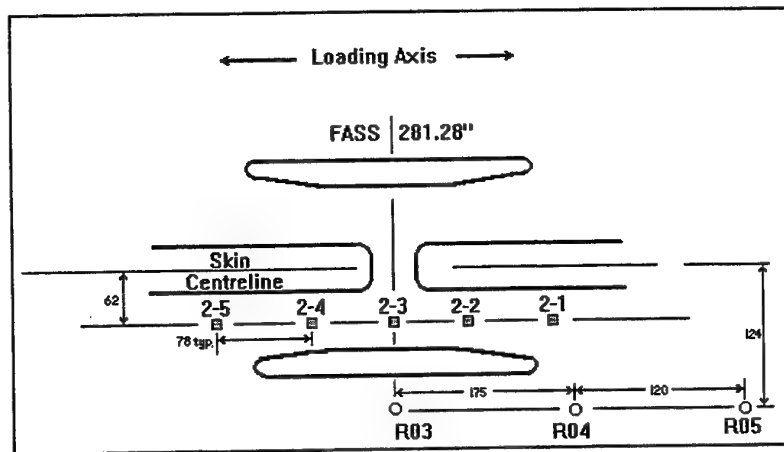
Strain gauge locations - View onto inner surface of Skin 2 of fully assembled Box 1 specimen.
